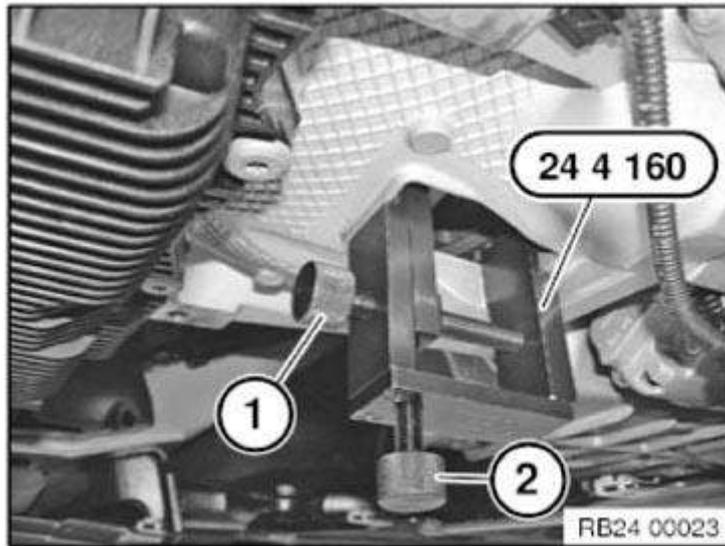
Inserting Special Tool 24 4 160 Into Recess Of Transmission Housing
